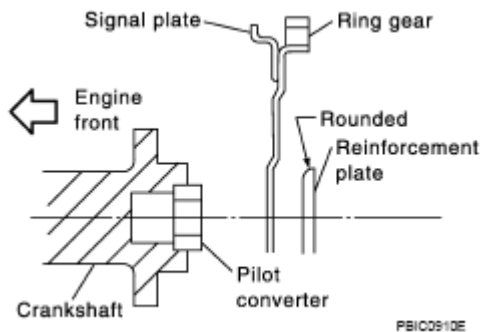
Identifying Drive Plate And Reinforcement Plate Installation
